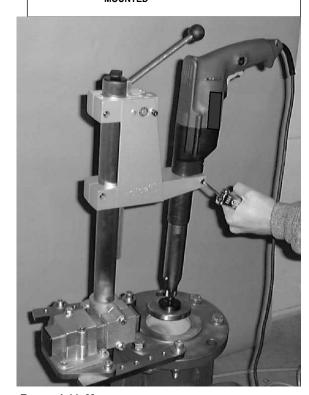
MACHINE AND COLUMN MOUNTING DEVICE ASSEMBLY
